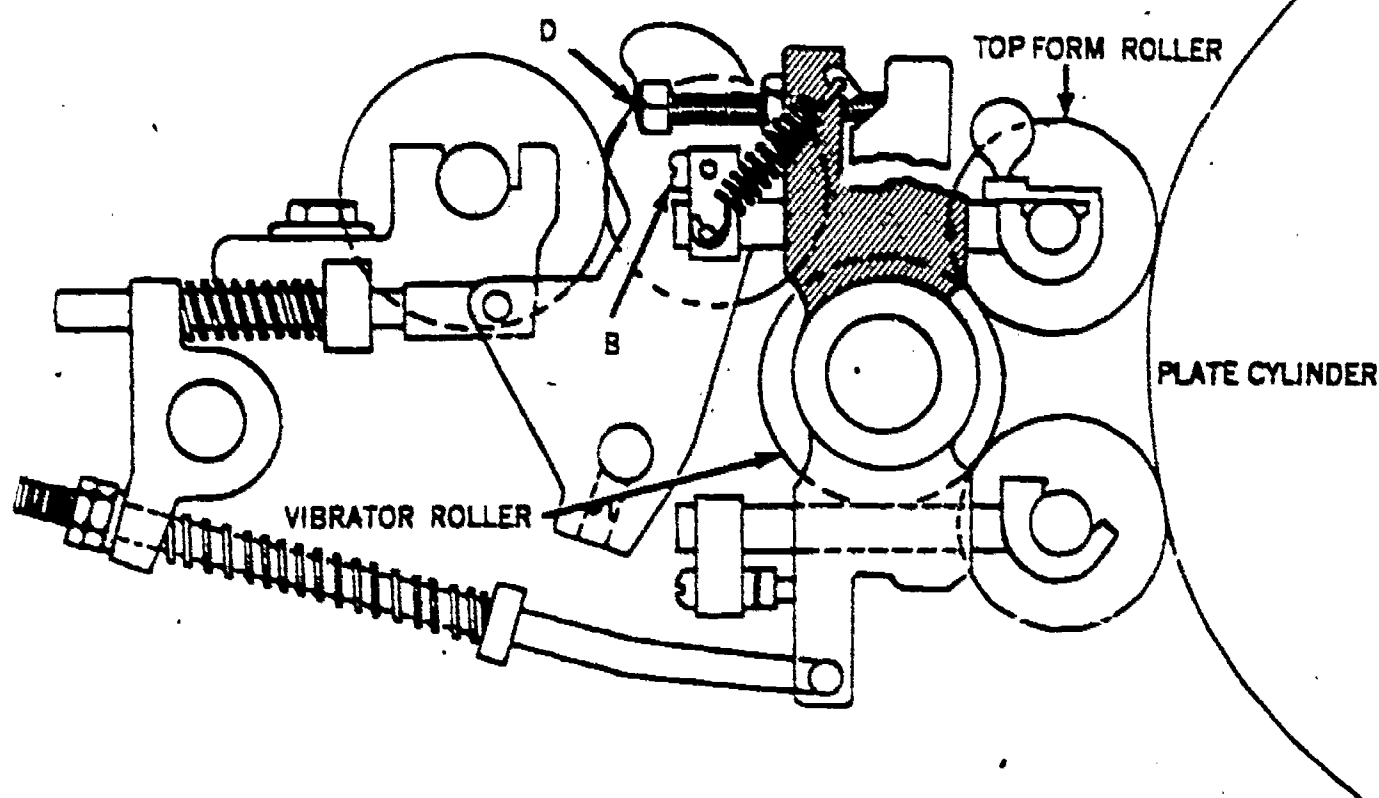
Setting and adjusting top form roller (dampening assembly).
